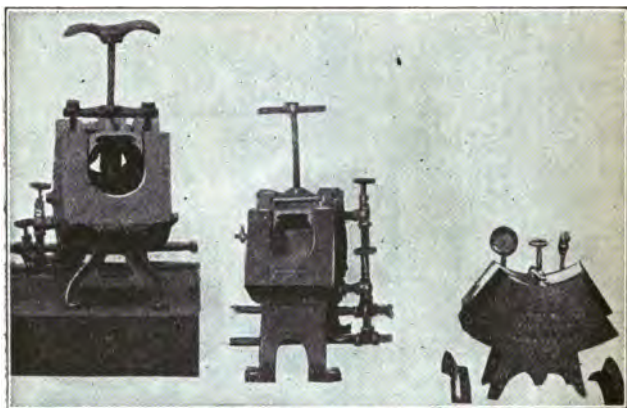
Sectional vulcanizers. Left—Akron-Williams, single steam chamber. Center—Akron Rubber Mould & Machine, single steam chamber. Right—Chas. E. Miller, single steam chamber.
